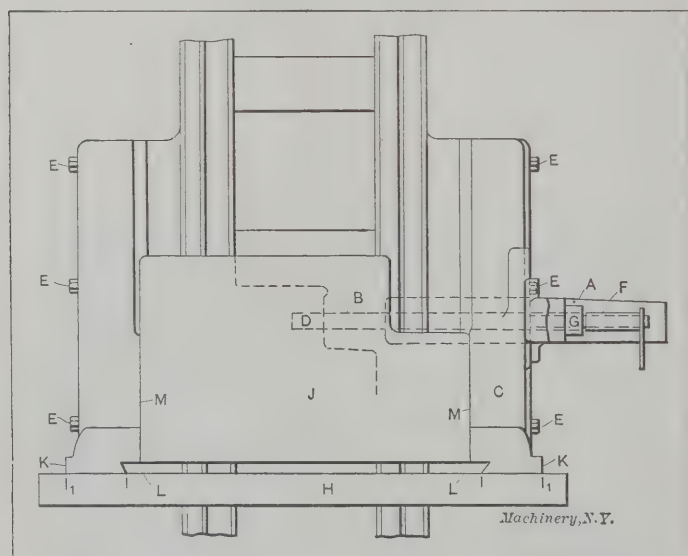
Method of Setting the Housings. First the Front Housing is set for Alignment of Driving Shaft Bracket "A," then the Back Housing is brought into the Same Plane by means of Straightedge "H"
